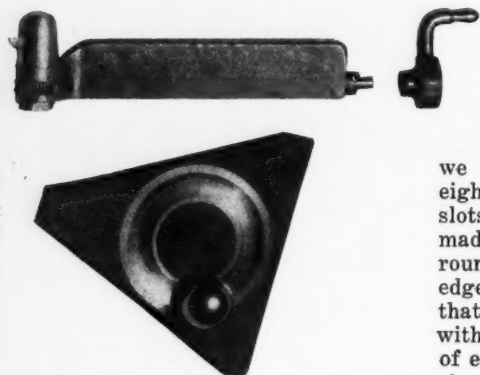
(Above) Adjustable Radius-Turning Tool with Crank Handle Removed. (Below) Ball Race Made with This Tool.
